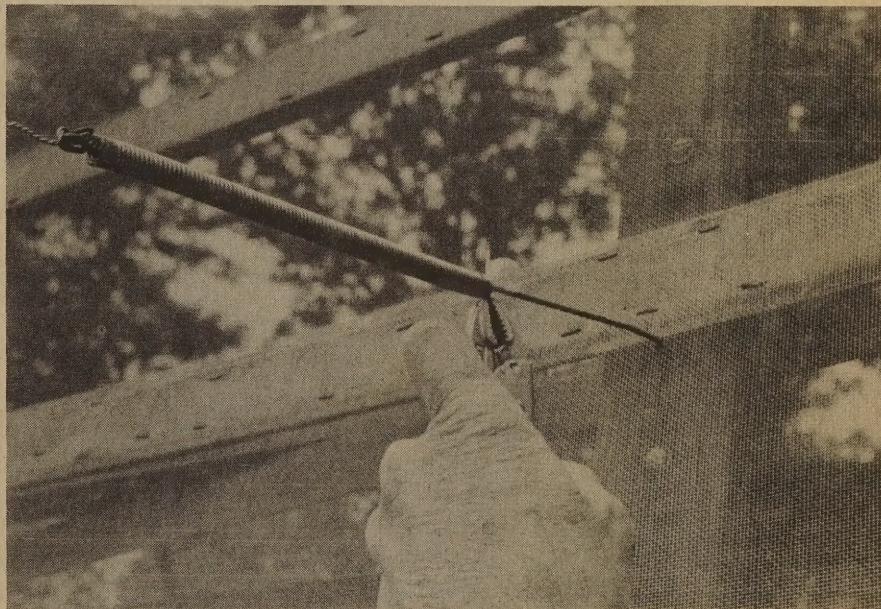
RADIUS WIRE, 30 feet long, is used to check the reflector's curvature. Adjustment bolts are set so that all points on the surface are exactly the same distance from the radius point.
